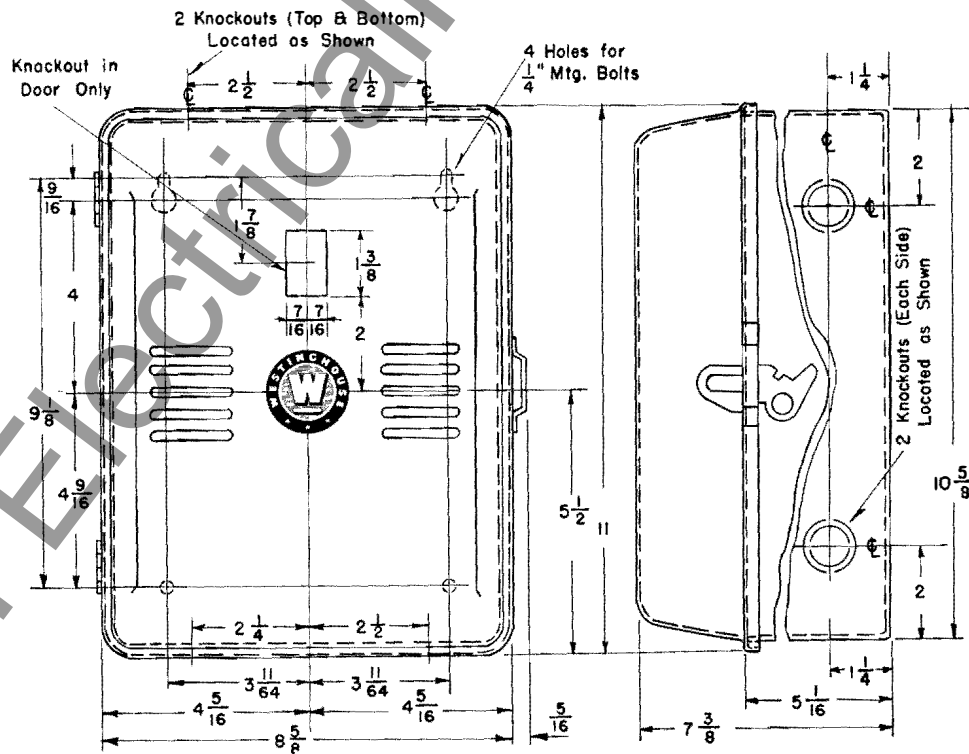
OUTLINE DRAWING FOR 25 CYCLE
